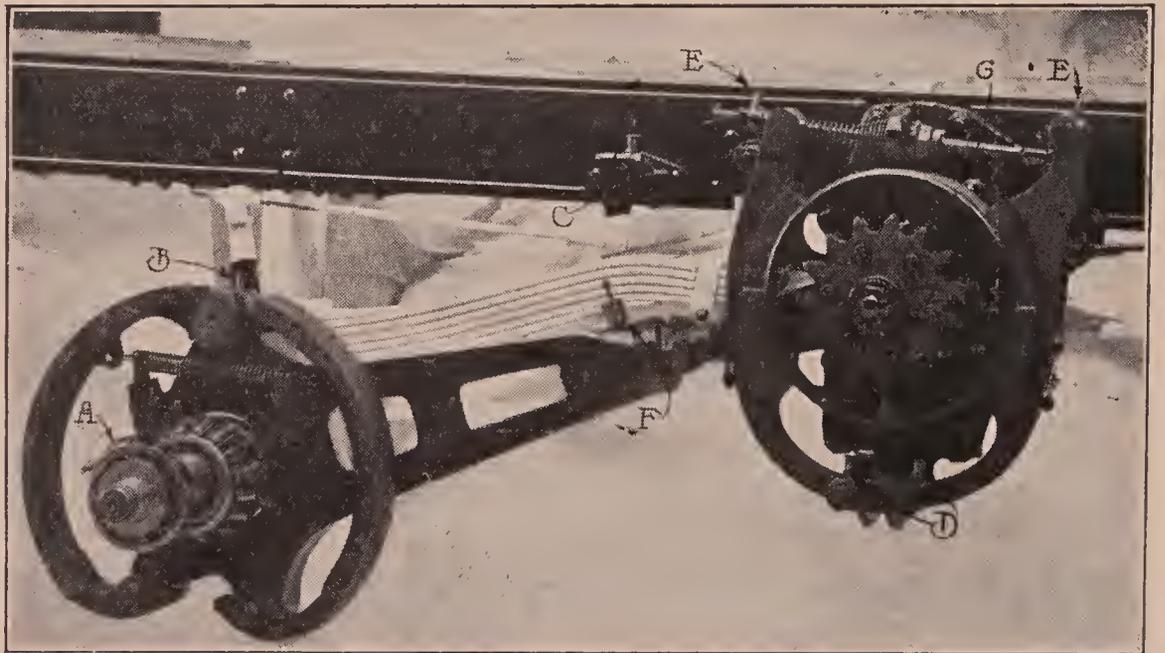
A Motor Truck Rear Axle and Countershaft, Showing the Places to Be Lubricated and the Manner in Which It Is Accomplished.
